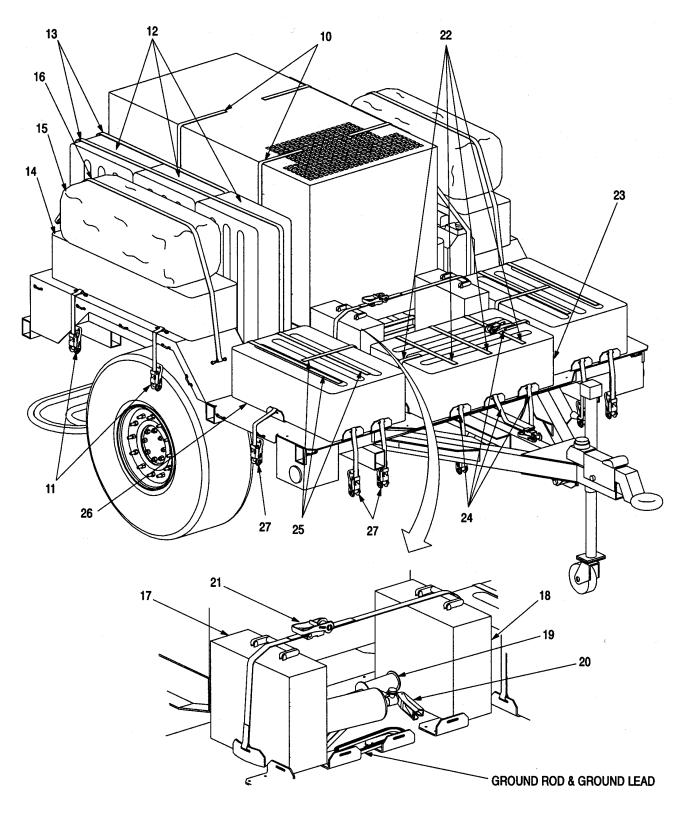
HMT Load Plan (Sheet 2 of 5)
